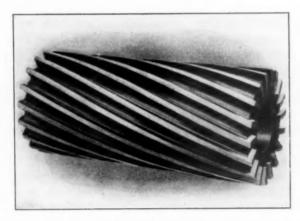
High Speed Inserted Steel Helical Blade Milling Cutter, 8 in Diameter, 34 in. Bore, 18 Blades
